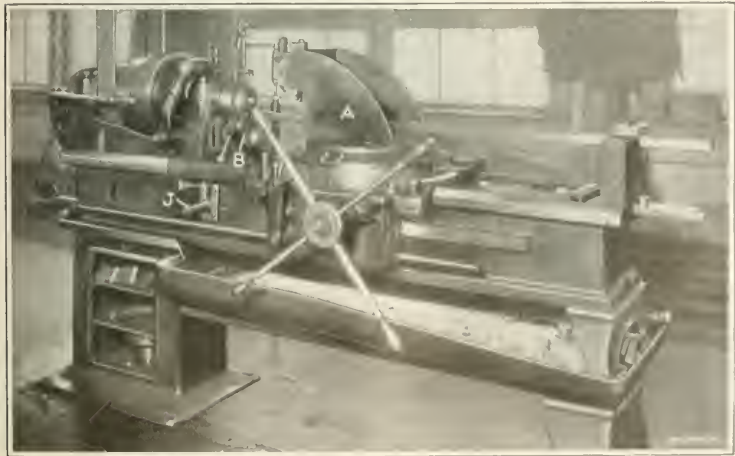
Old Type of Jones & Lamson Turret Lathe especially equipped for turning Cutter Blanks
